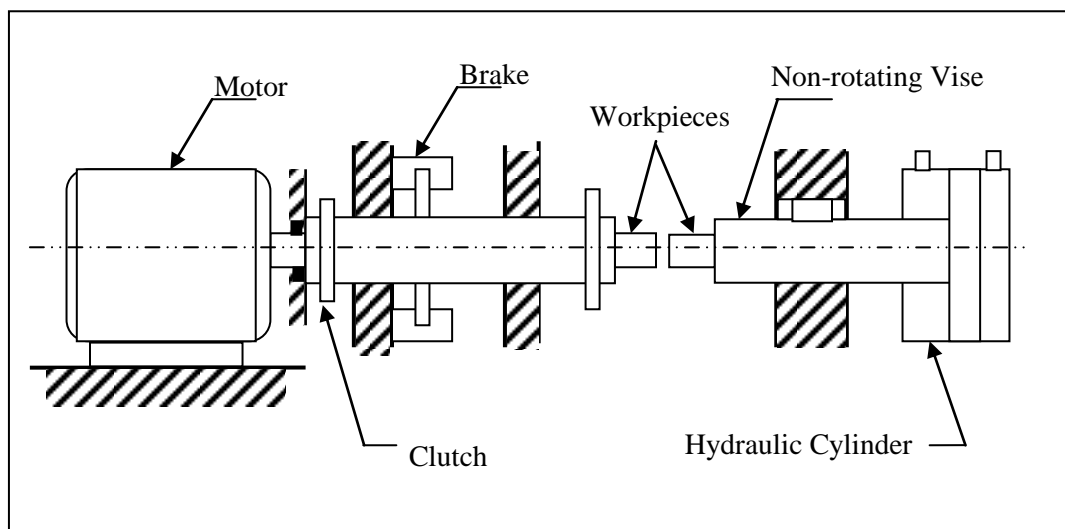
Basic arrangement of a direct drive-welding machine (Sahin, 2009c)
